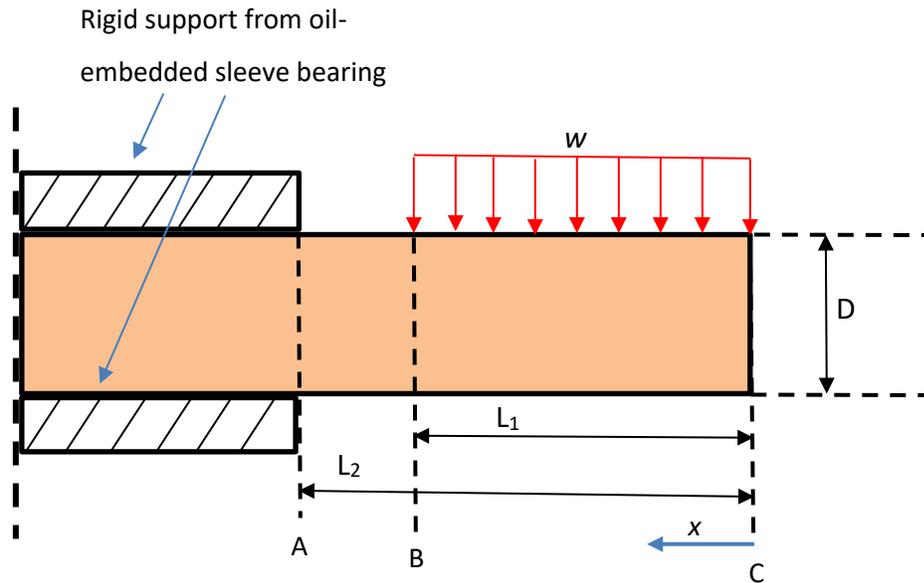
Drive End Shaft Stress Analysis with Distributed Load, w , from Welding Fixture Yoke
